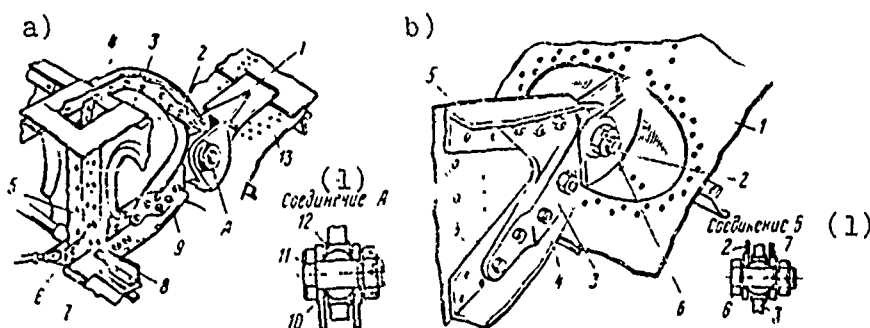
The attachment fittings of the upper wing to the fuselage: a) front fitting: 1 - fuselage fitting; 2 - attachment fitting of wing; 3 - frontal covering; 4 - upper spar flange; 5 - spar web; 6 - rib strut; 7 - lower flange; 8 - rib No. 1; 9 - cover plate; 10 - spherical bearing; 11 - clamp bolt; 12 - clip; b) rear fitting: 1 - fuselage skin; 2 - fuselage fitting; 3 - wing fitting; 4 - bolt; 5 - rear spar; 6 - clamp bolt; 7 - spherical bearing.
